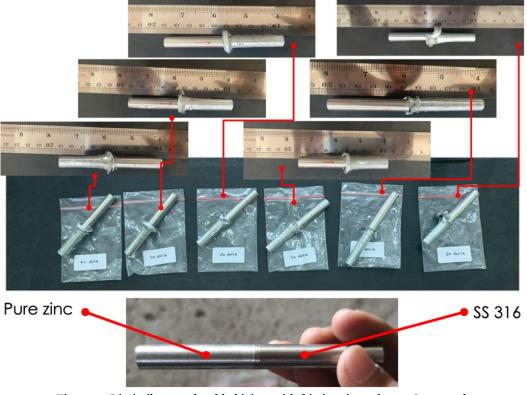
Dissimilar metal welded joints with friction time of 30 to 80 seconds
